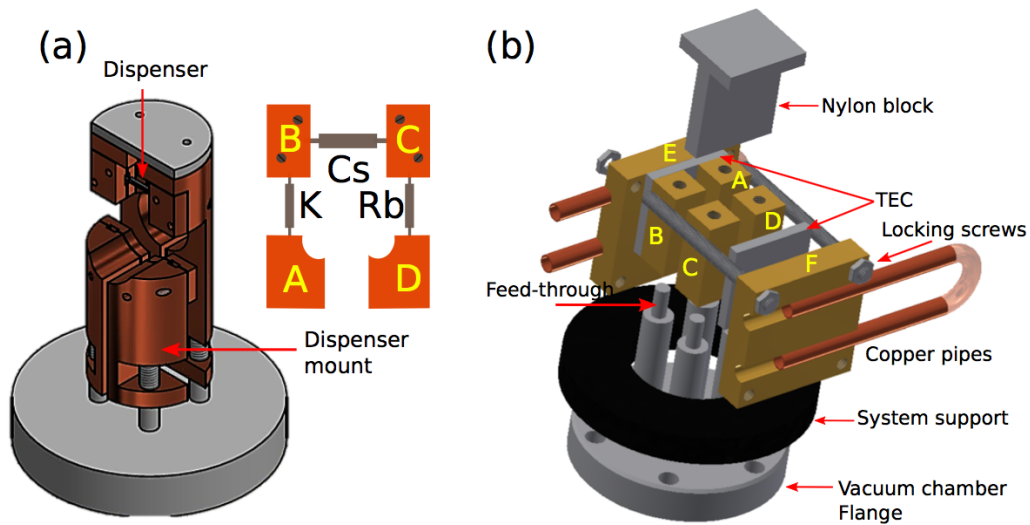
(a) The drawing of the copper dispenser mount inside the vacuum chamber. Here, the dispensers are configured in such a way that one power supply can run both K and Cs dispensers. (b) The assembly of a water cooling system. It composes of four brass blocks (A - D) connected to the end of electrical feed-throughs. The next layer is two TECs (depicted in grey) for cooling attached with the E & F brass blocks. Each of these have the copper tubes, which water passes through. All components are in place by locking screws as illustrated in the figure. A nylon block is placed in the middle of side AB and CD to support any compression during assembling, which may crack the feedthroughs.
